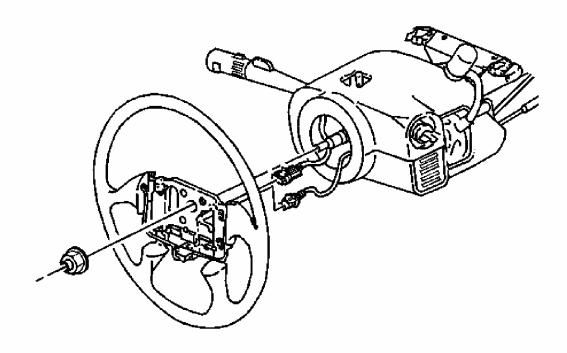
Steering Wheel, Shaft & Nut Courtesy of GENERAL MOTORS CORP.
